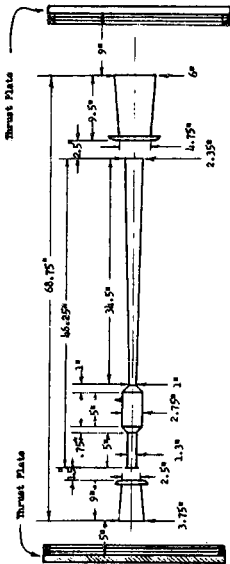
DIMENSIONS OF CONFIGURATION C-1 VALVELESS PULSEJET COMBUSTOR WITH CONICAL COMBUSTION CHAMBER
